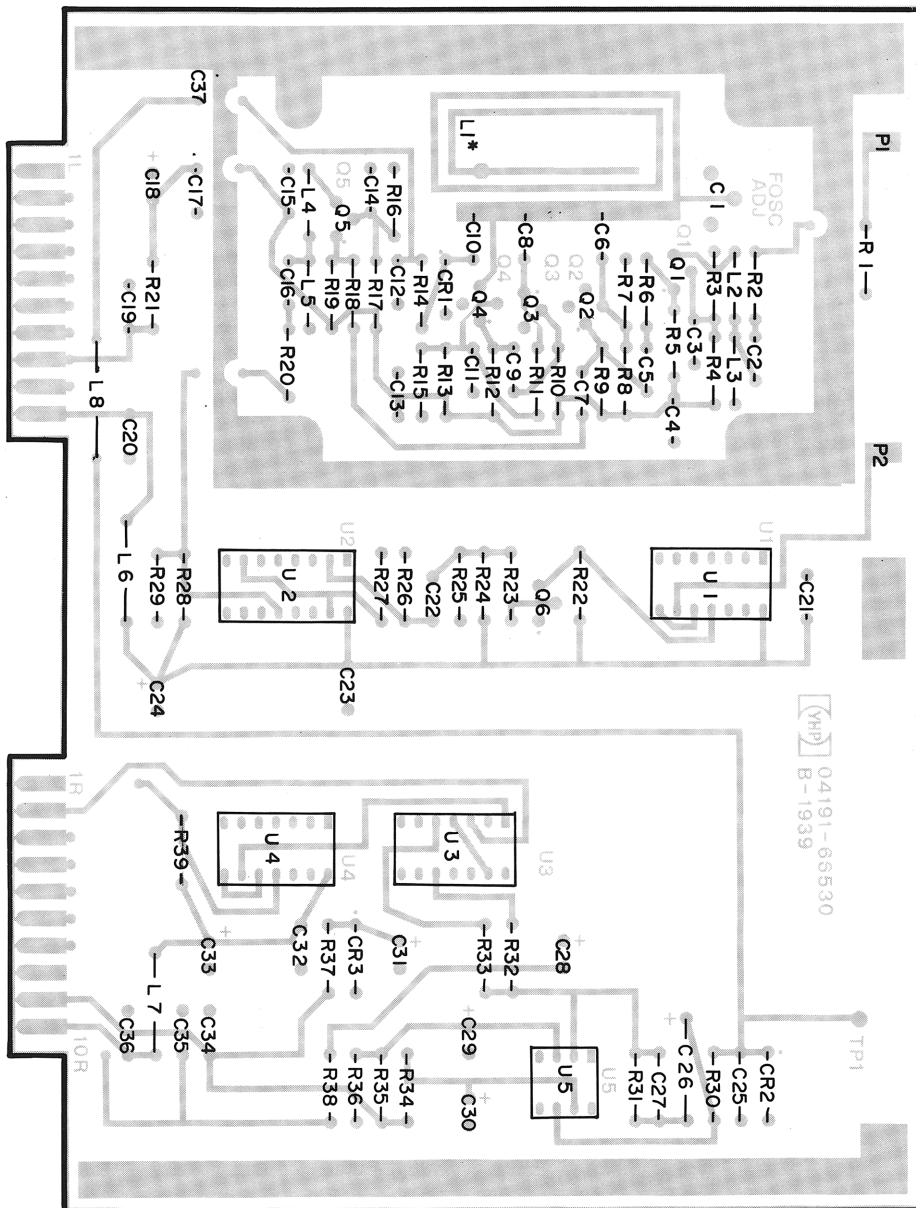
A30 VTO (100-110MHz) Board Assembly Component Locations.
